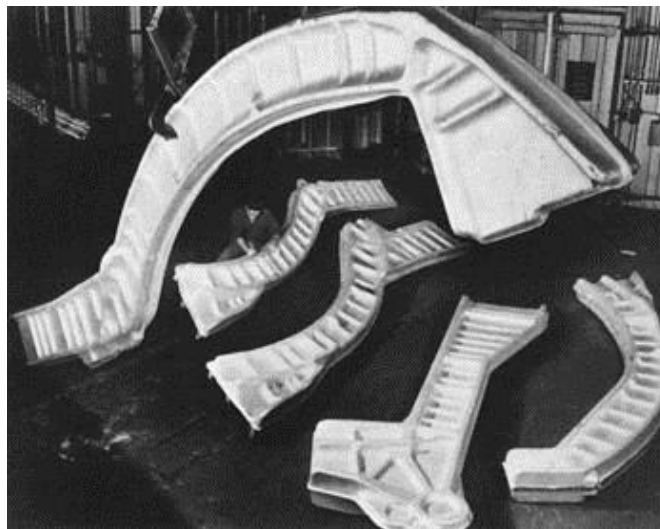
7050 aluminum alloy aircraft parts formed by closed die forging².
